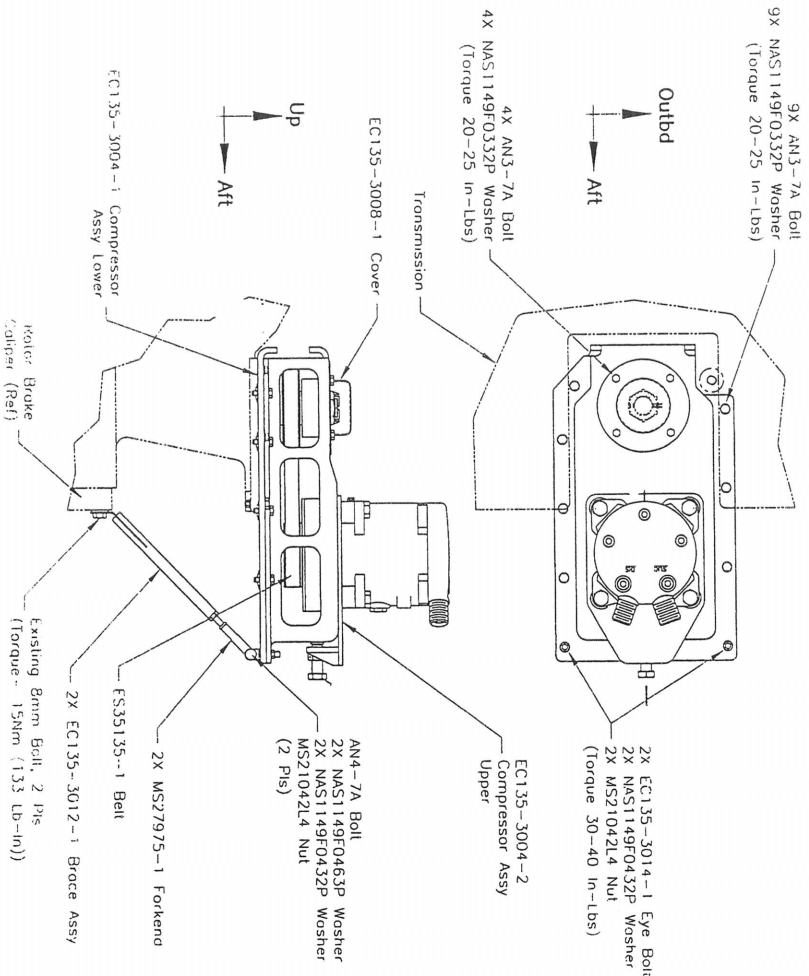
Compressor Installation & Compressor Drive Pulley Build Up (side view)
